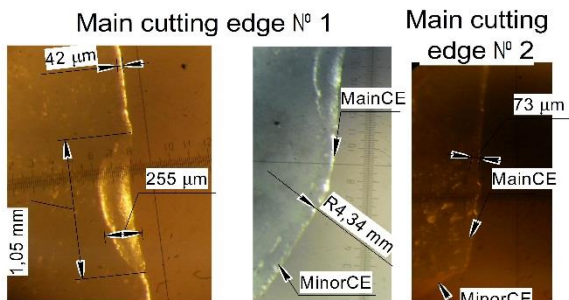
Cutting Edge Chipping and Outer Corner Rounding
